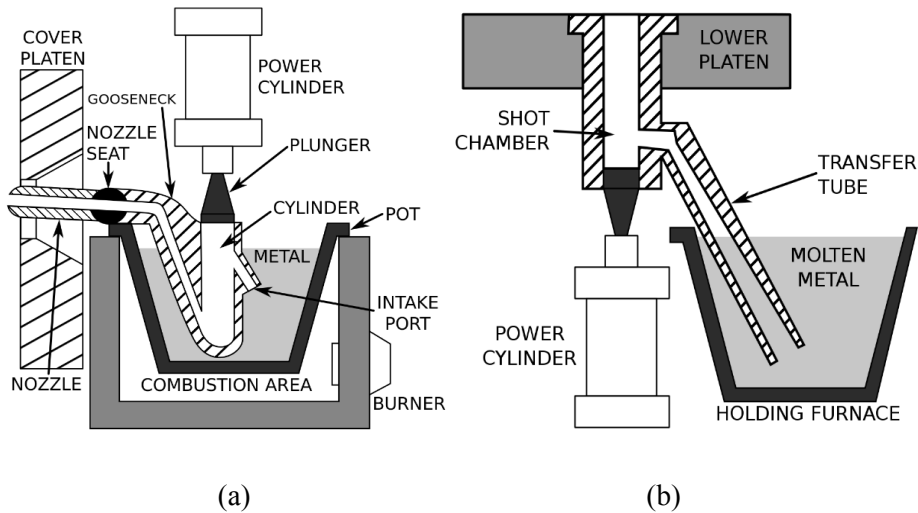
Schematics of high pressure die-casting machine: (a) hot chamber type and (b) cold chamber type
